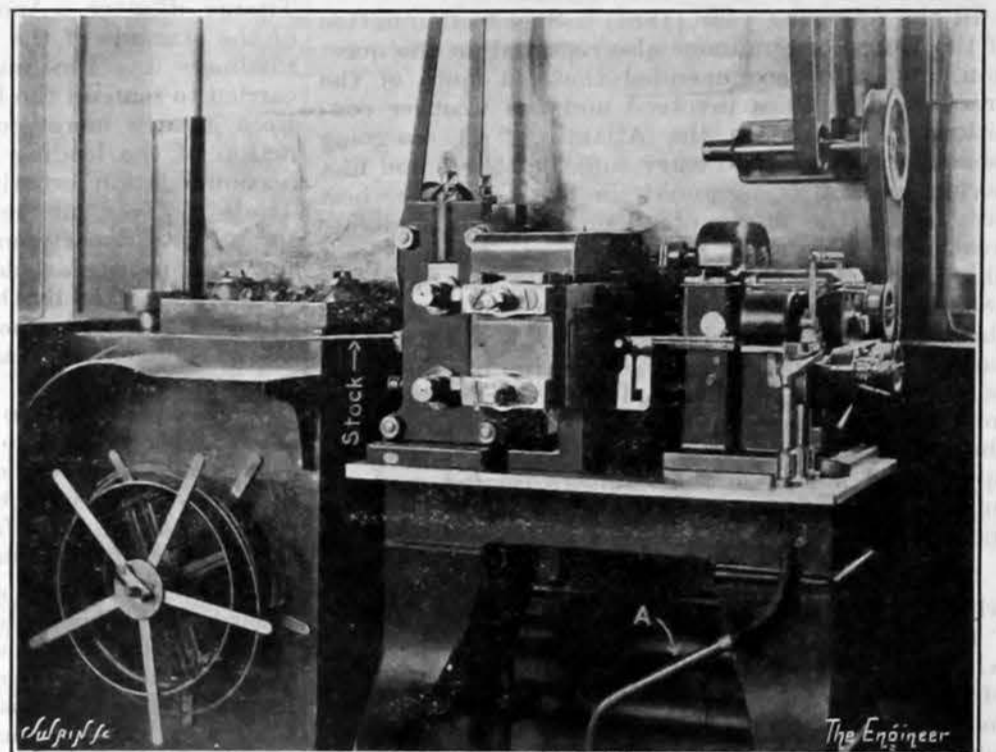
MATRIX STOCK ROLLING AND CUTTING-OFF MACHINE
